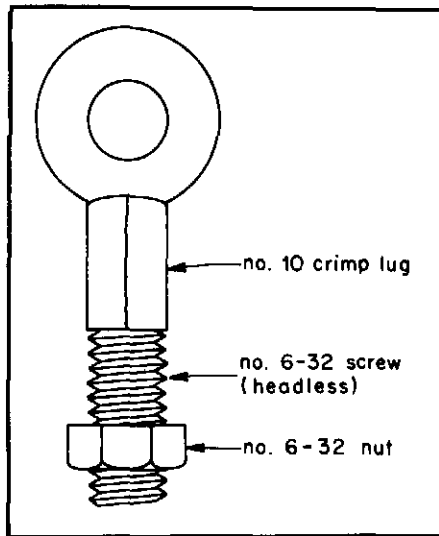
Bill Fleming uses a no. 10 crimp lug and a headless no. 6-32 screw in place of a spade lug. The nut secures the lug to the mounted surface; not shown is the hardware necessary to secure the crimp lug to the mounted object.
